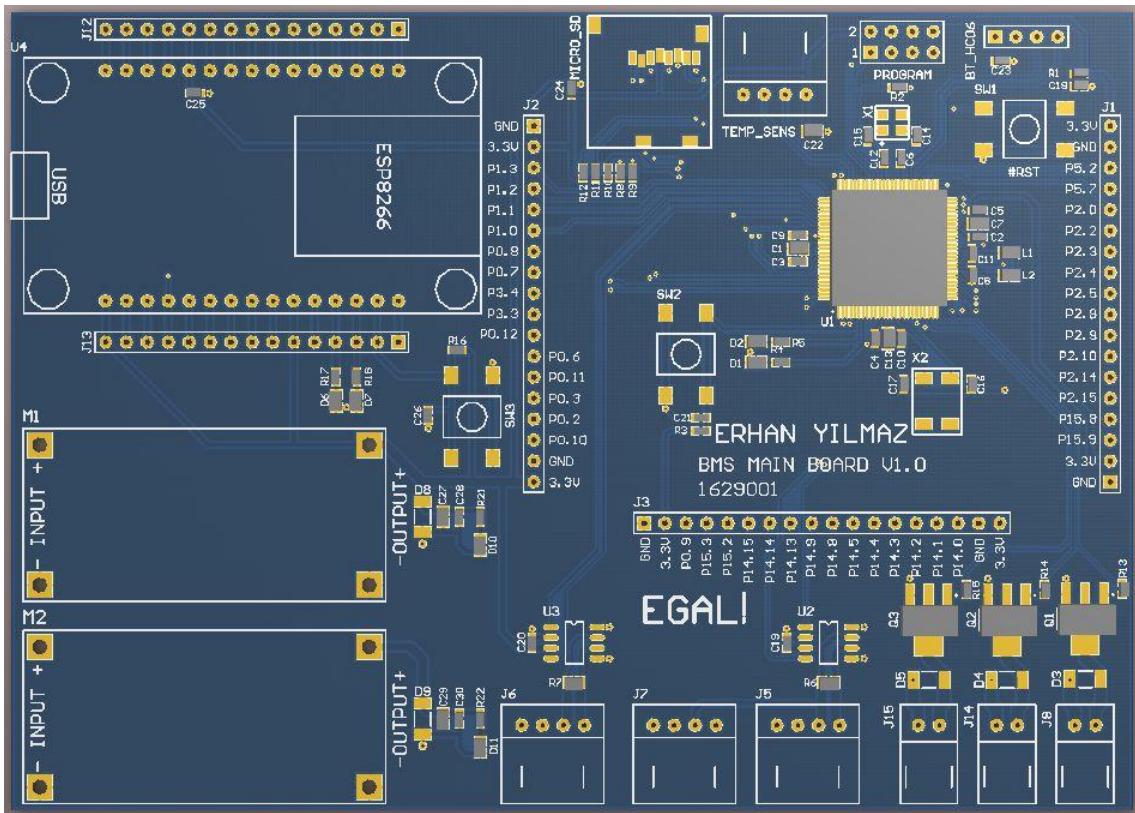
3D Rendering of the Main Card Printed Circuit Board
